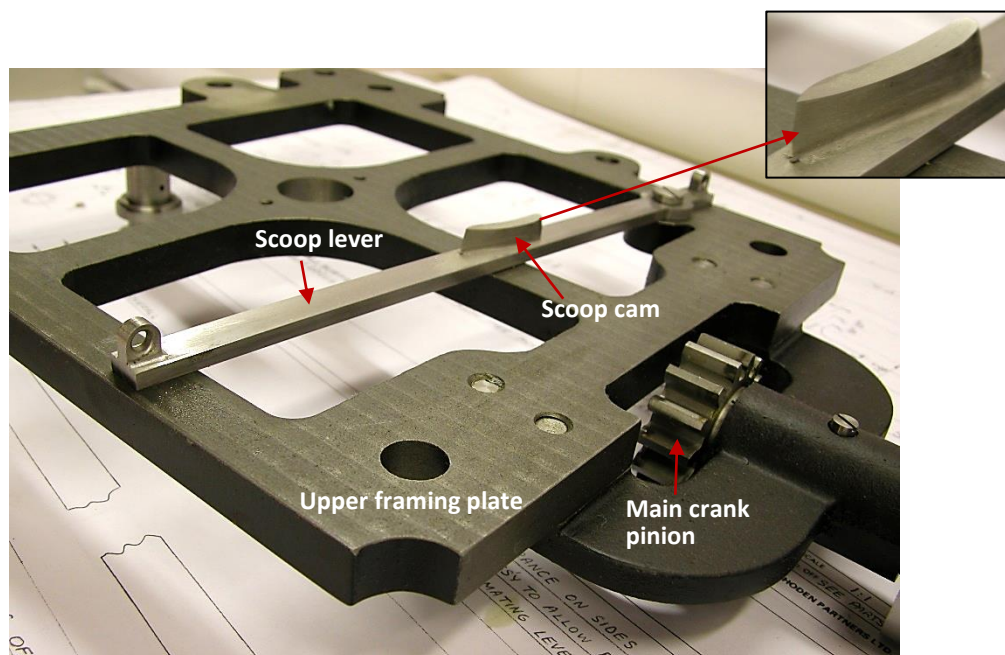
Uncoupling clutch scoop lever, framing plate, and pinion drive.
